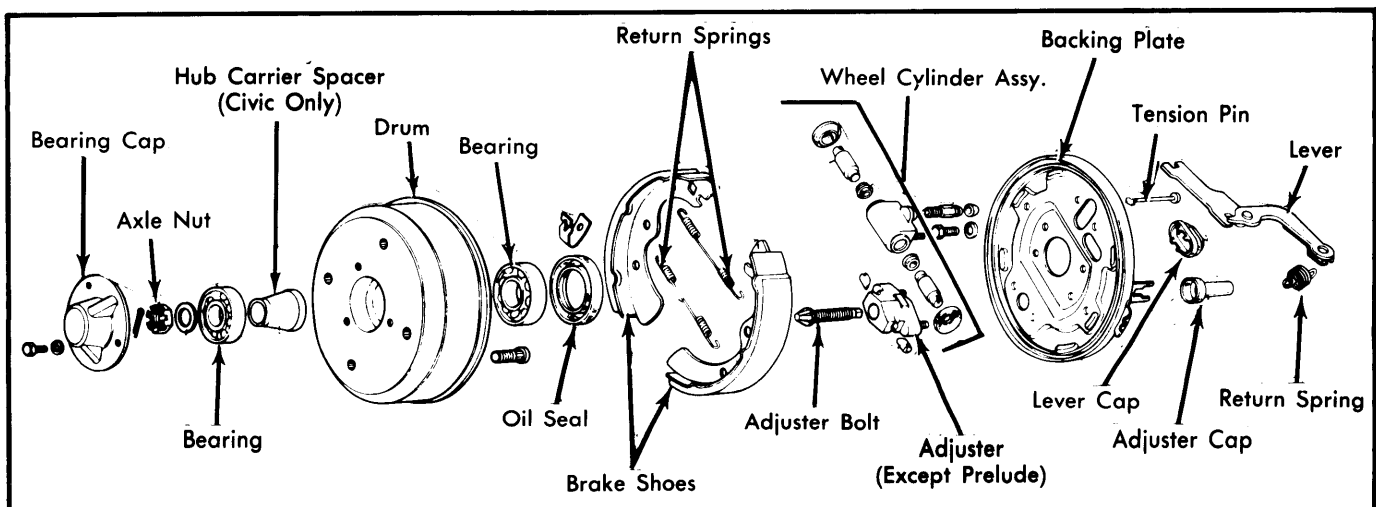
Exploded View of Honda Rear Drum Brake Assembly (Civic Shown; Others Similar)
